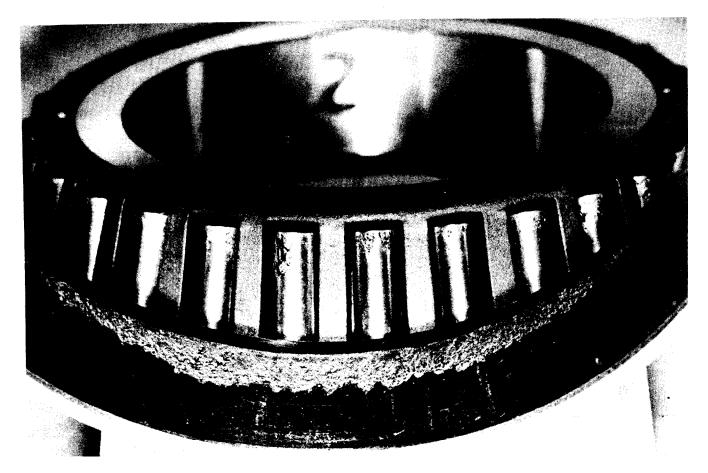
Bearing failure, spalling and pitting, due to overload from misalignment.
